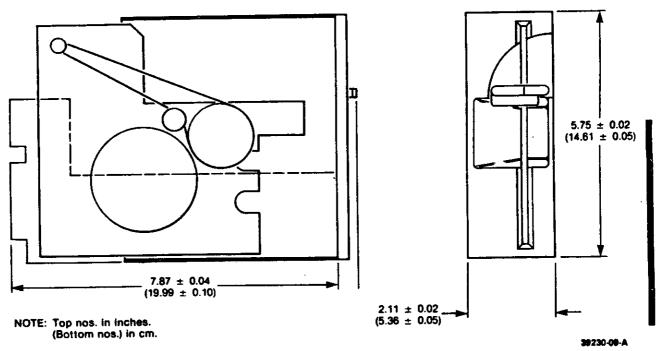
SA200 PHYSICAL DIMENSIONS
